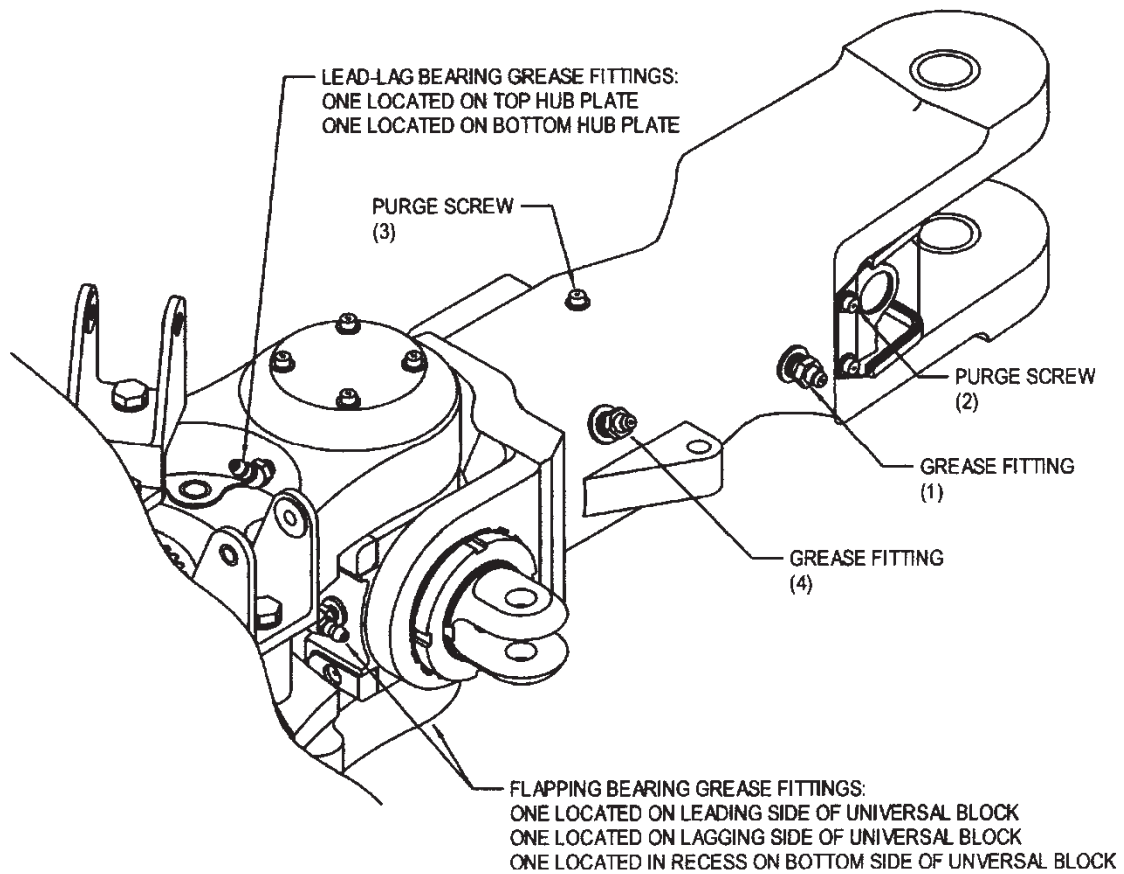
Main Rotor Blade Grip, Lead-Lag Bearing, and Flapping Bearing Lubrication
